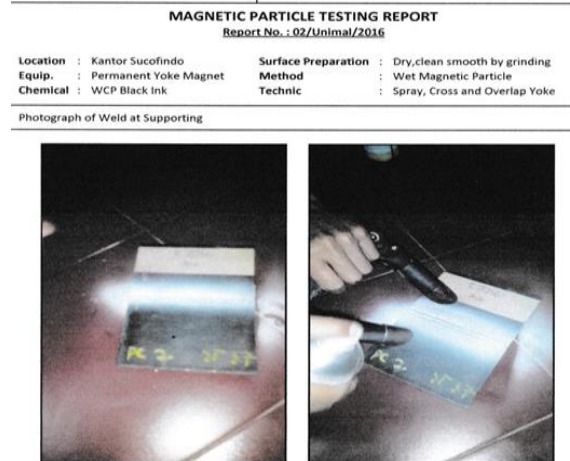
Examination of weld defects by Magnetic Particle Testing method, Material ST 37 water cooling medium
